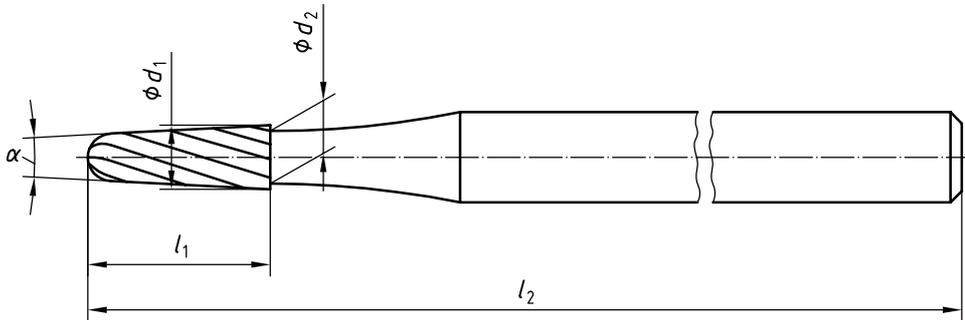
Conical, sharp edge, head length above 6,5 mm, carbide finishing burs
